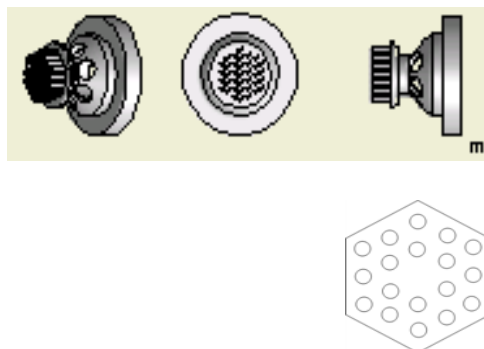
The schematic drawing for the die and the desirable geometry of the 18-hole extruded element
